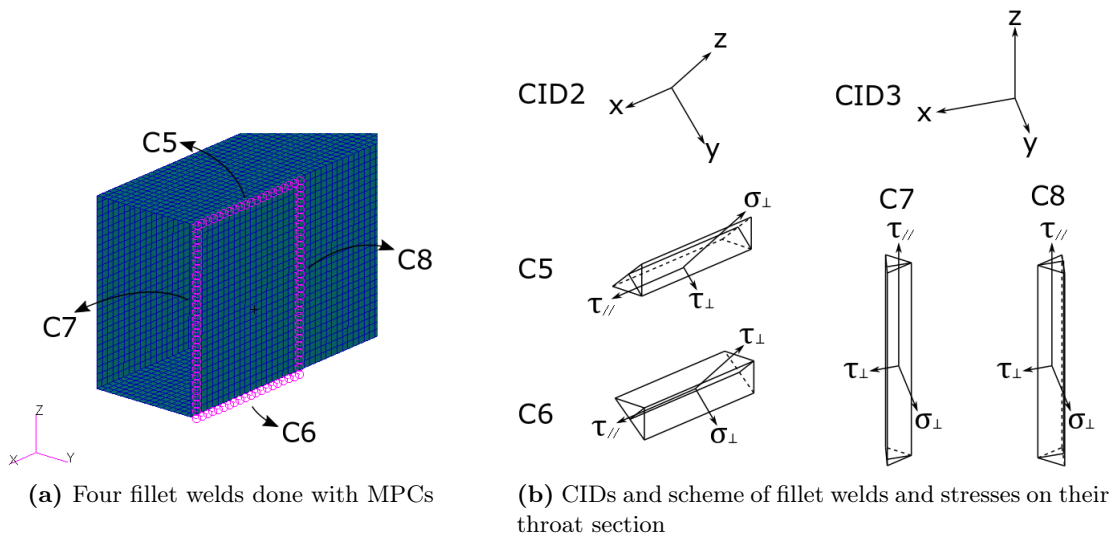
Fillet welds and coordinate systems of the welding between the thinner flange and beam with axis aligned to X-axis
